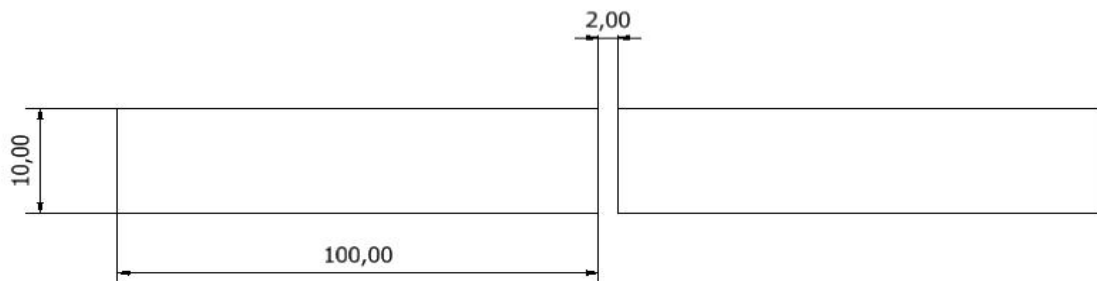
the dimension of butt welding joint (for samples A,B,C)
